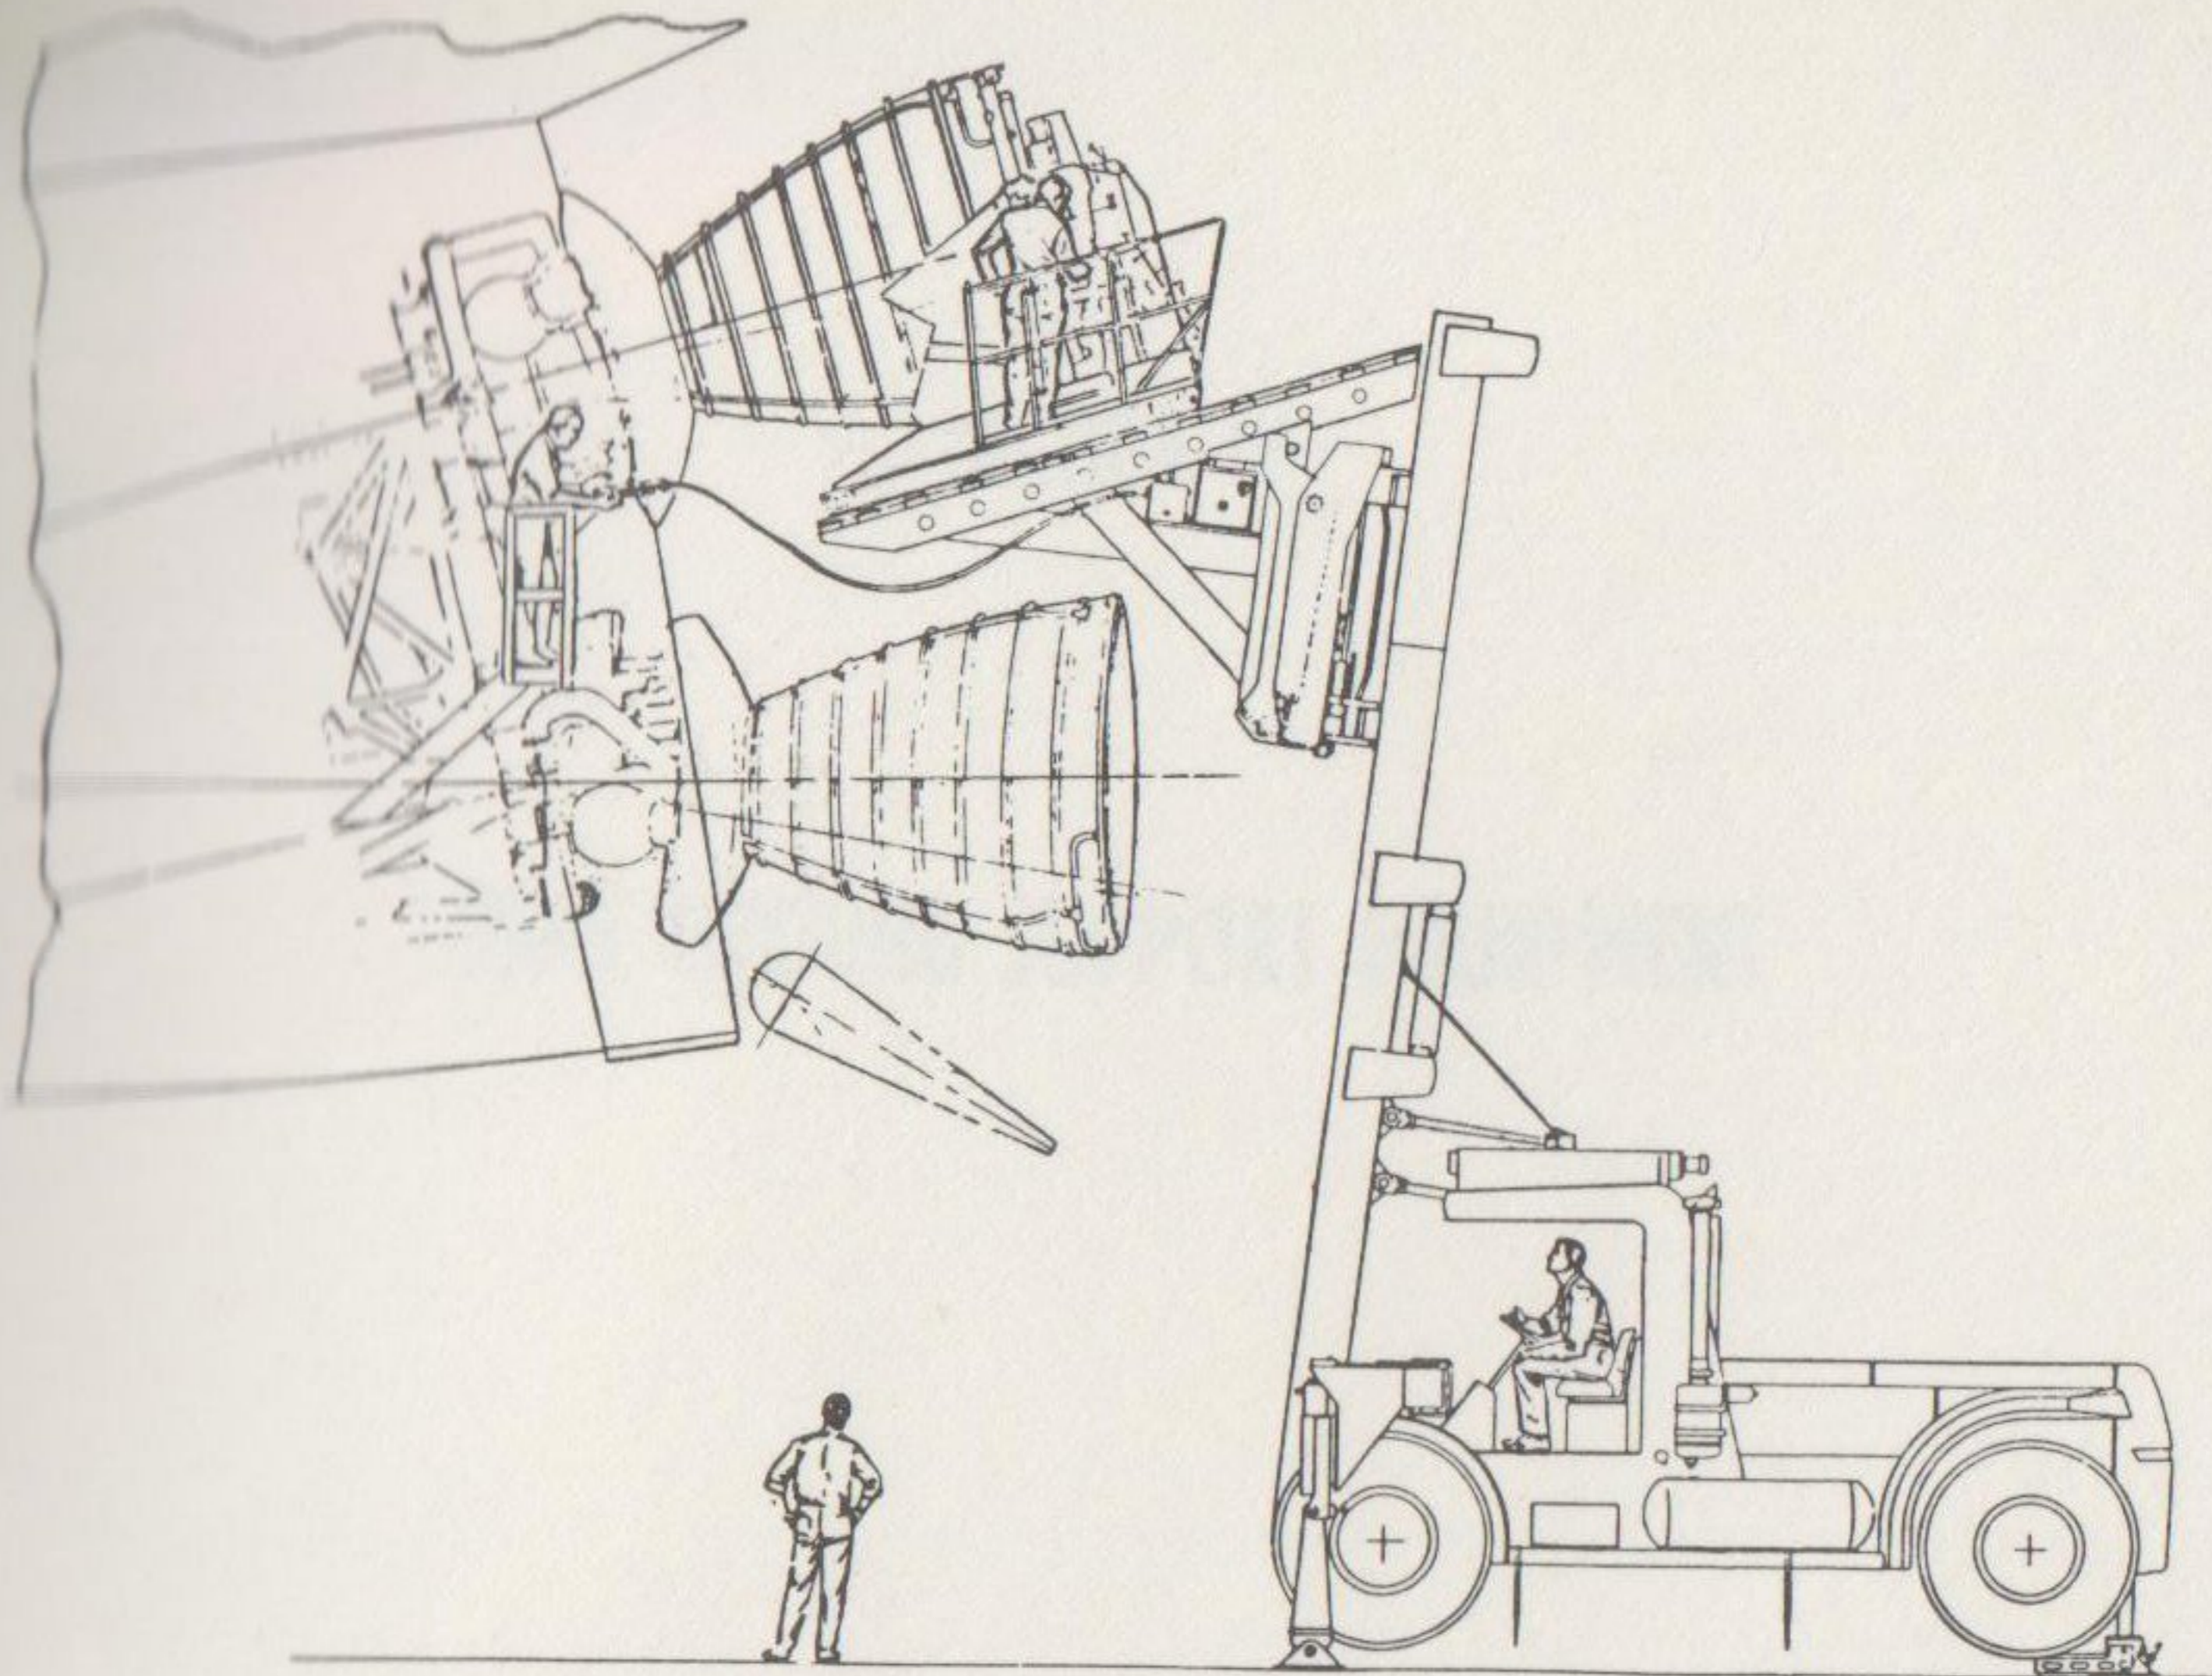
HORIZONTAL ENGINE REMOVAL
